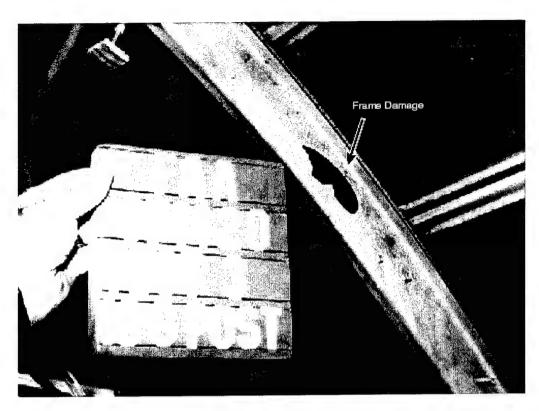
FRAME DAMAGE AT HANGING RAIL ATTACHMENT POINT FS 500A
